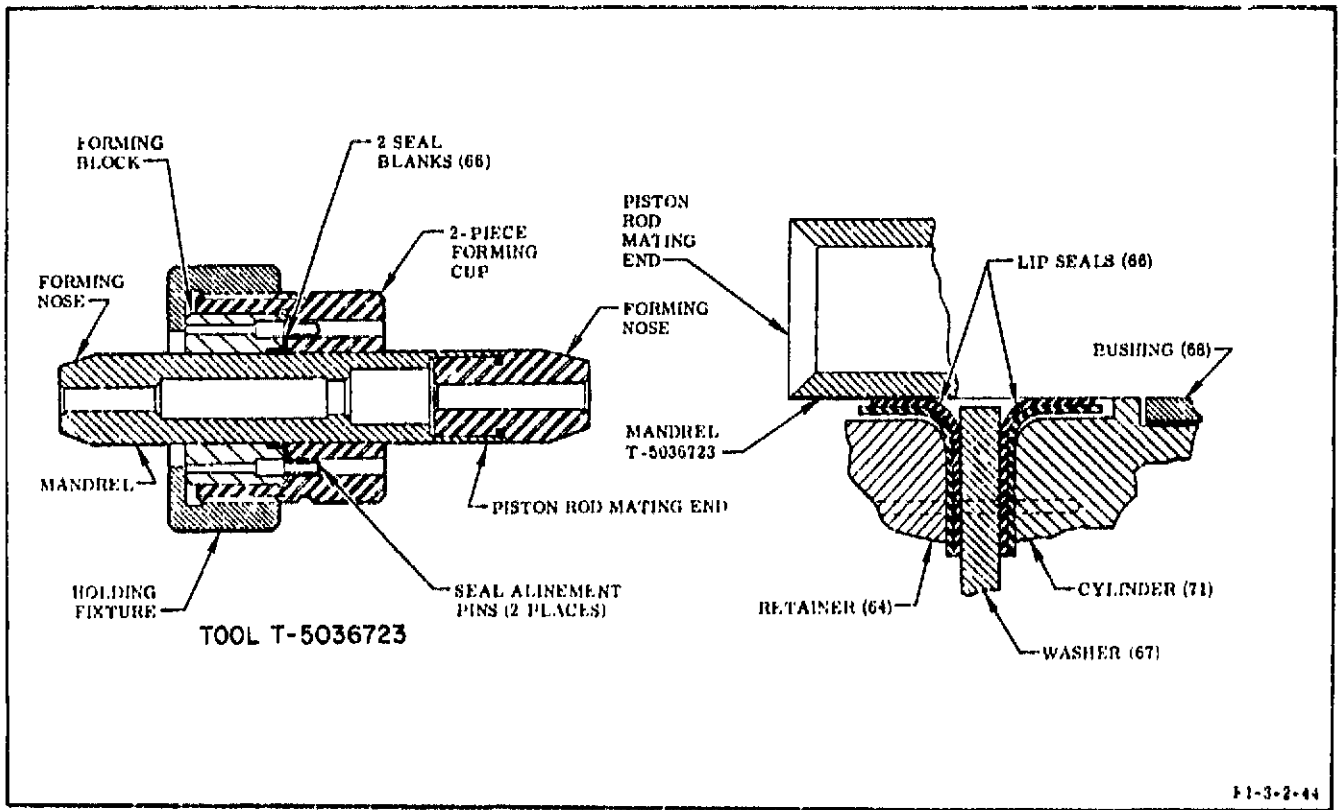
Oxidizer Valve Cylinder Lip Seal Installation
